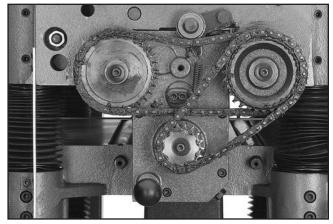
Gearbox cover removed to expose drive chains and sprockets for lubrication.
